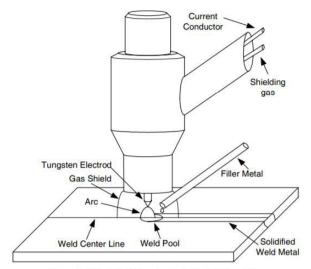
Principle of Tungsten Inert Gas (TIG) welding.
